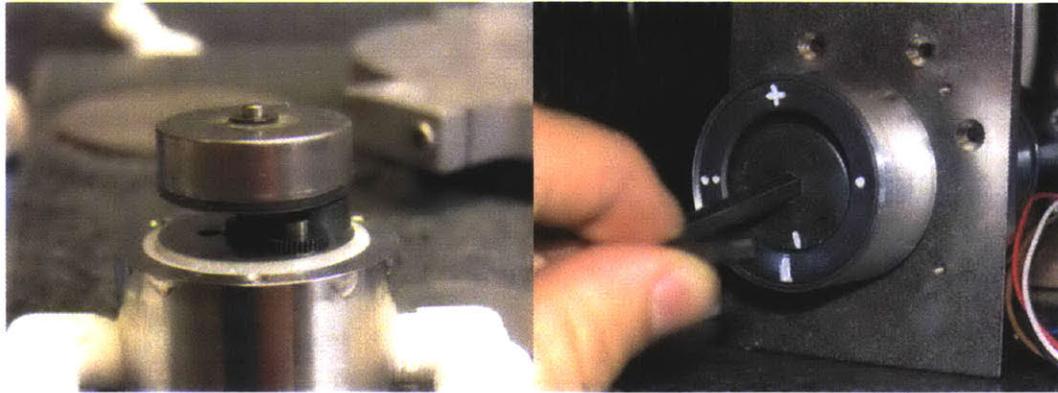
Pump head side of magnet coupling (left), motor side of magnet coupling and stiffness test (right)
